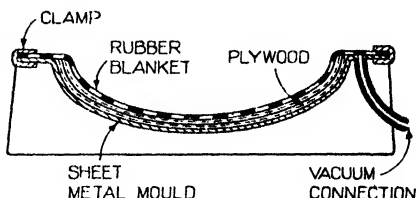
Later Duramold process employing a female sheet-metal mould, in conjunction with a rubber blanket.
